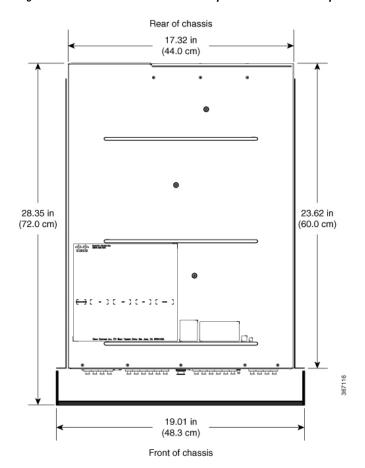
Cisco ASR 9901 Router Chassis Footprint and Dimensions—Top View
